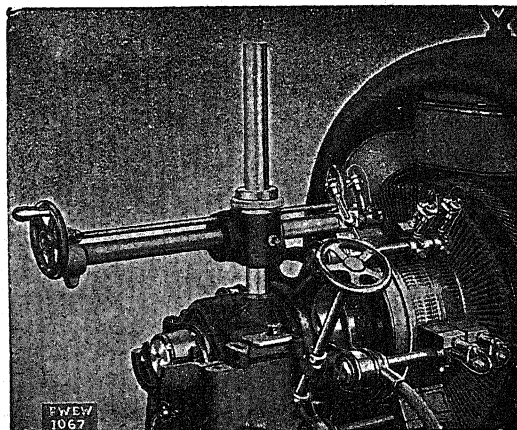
General Electric yoke type commutator truing device for machines having brush mechanism mounted on a yoke carried by the field frame. *It consists of* a carriage for the tool holder having a screw feed and a bracket for attaching to the brush yoke. The bracket replaces two brush holder brackets on the brush yoke, and is made to fit the yoke of the particular machine on which it is to be used.
